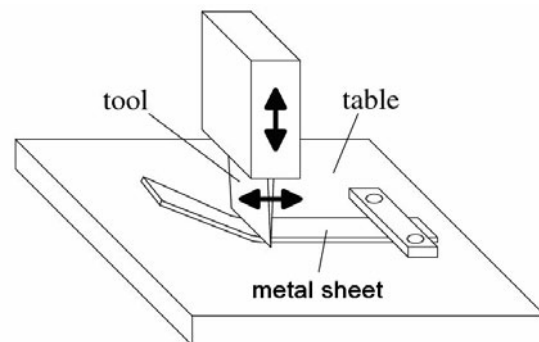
Schematic illustration of bending a metallic sheet by tool slide
